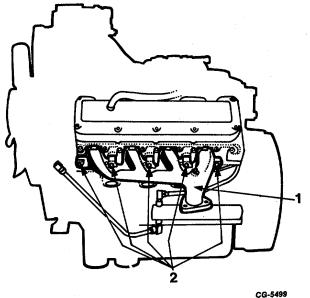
Removing Exhaust Manifold Left Side of Engine
